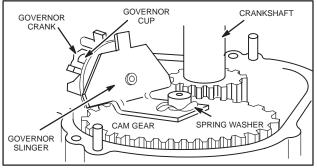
SHOWS SPRING ON CAMSHAFT AFTER GOVERNOR IS INSTALLED. MODELS 100900 AND 130700, 130900, 131900, ONLY.
